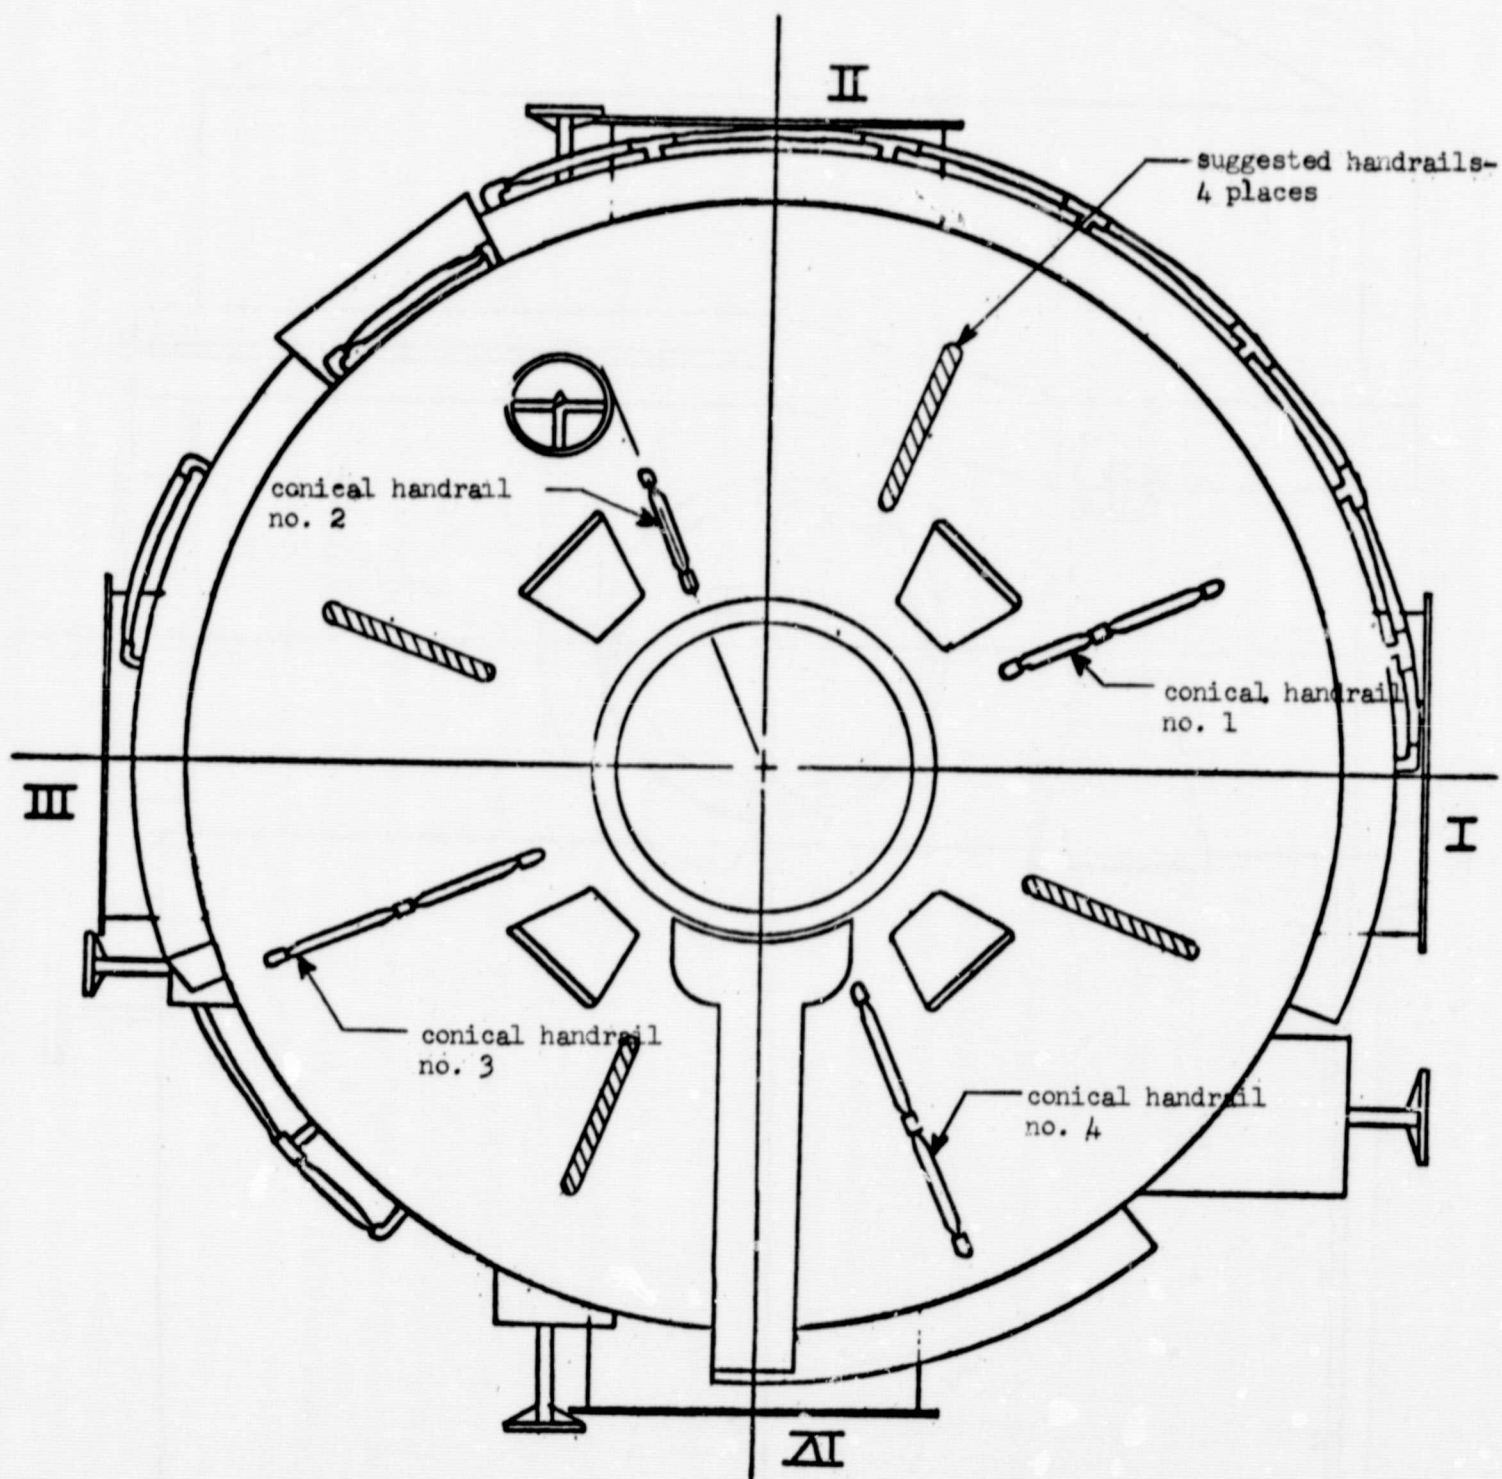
SUGGESTED HANDRAILS TO BE ADDED TO CONICAL SECTION
